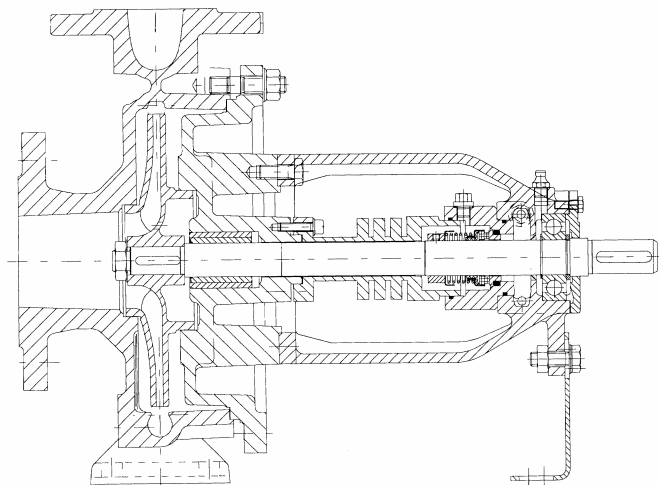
Heat transfer oil pump with mechanical seal to EN 733
